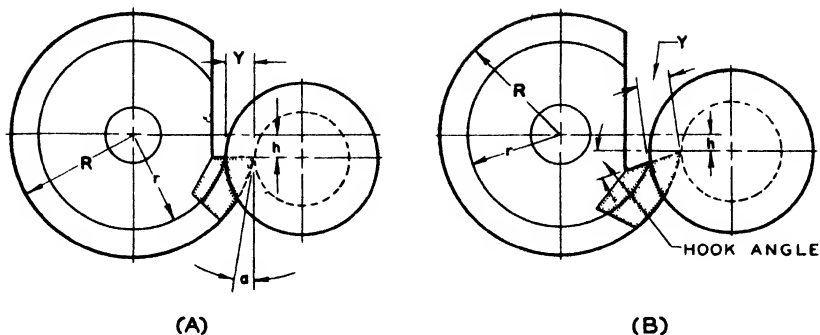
Circular Forming Tool with Zero Back Rake (A) and with Positive Back Rake (B)
